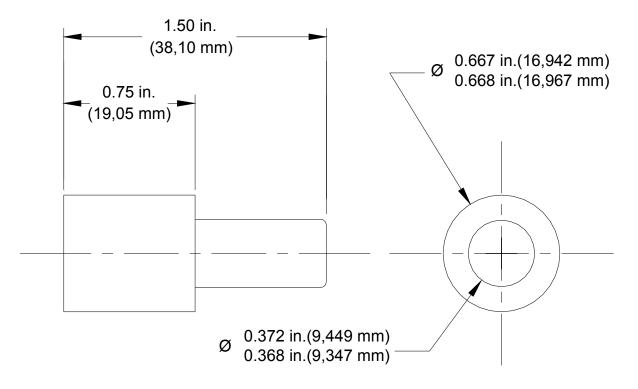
Armature Shaft Adapter, Anti-Drive End
